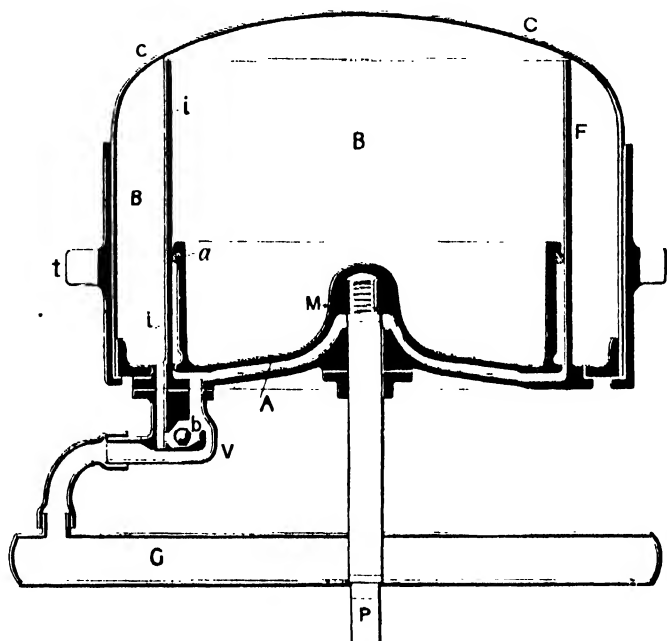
Clayton Brake Cylinder. "Brakes off" position
